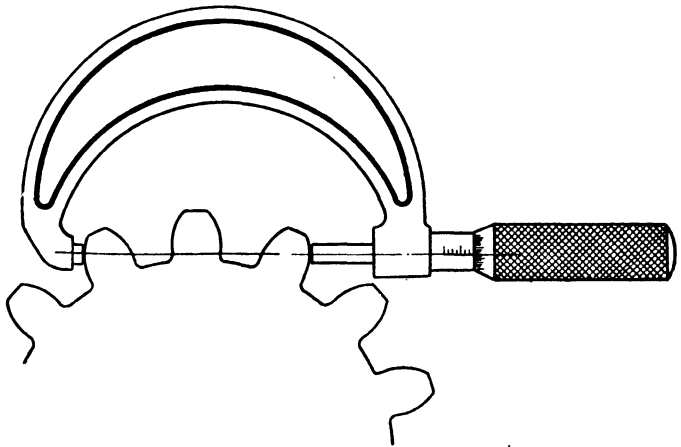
MICROMETER MEASUREMENT OF GEAR-TOOTH THICKNESS
